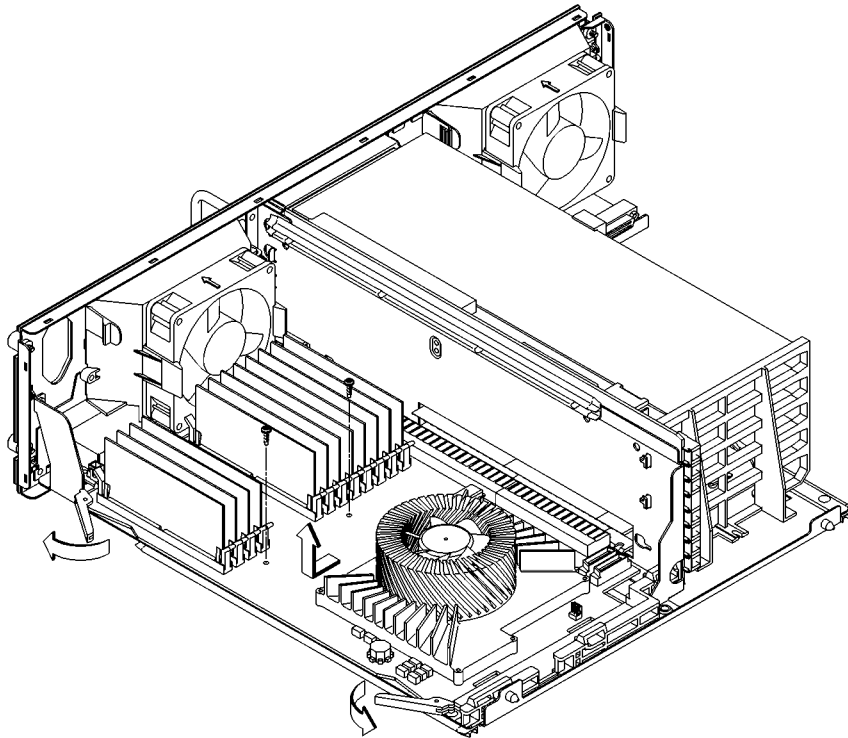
Removing the CPU Board (C160/180/200/240/360)
